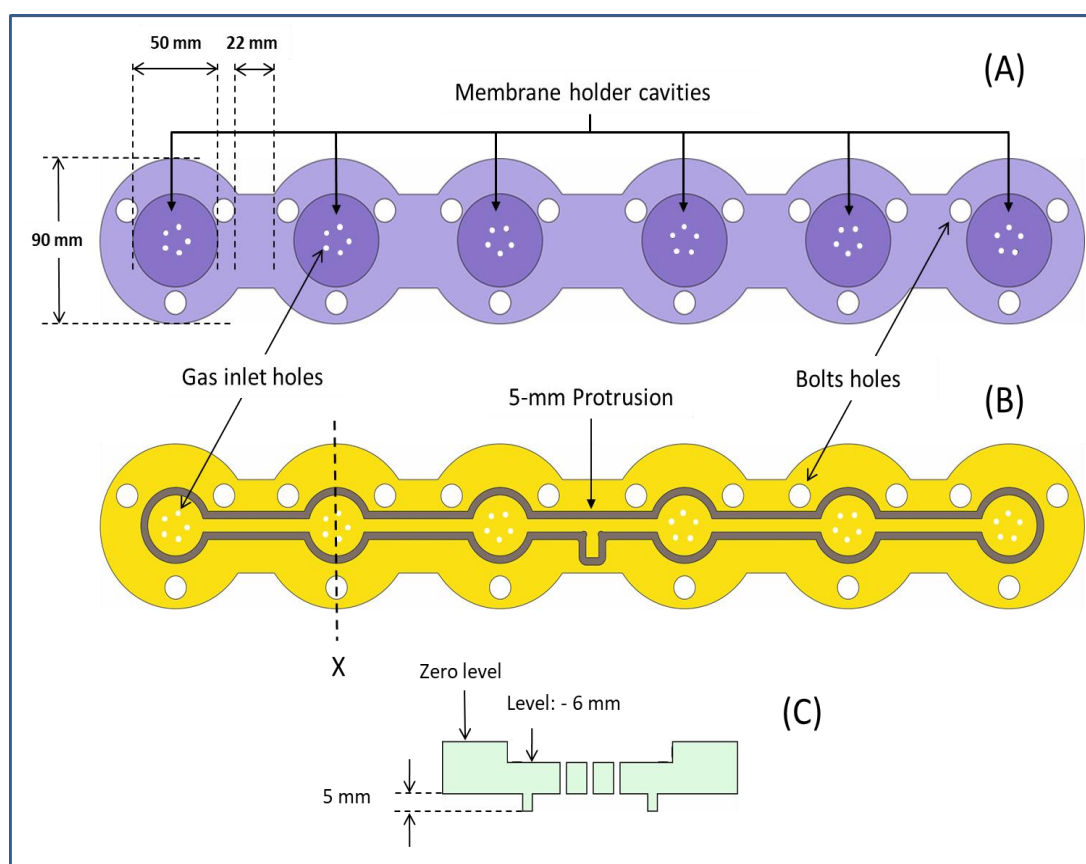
The construction details of the second (upper) layer of the gas distributor unit. Top view (A), bottom view (B) and cross section view (C)
